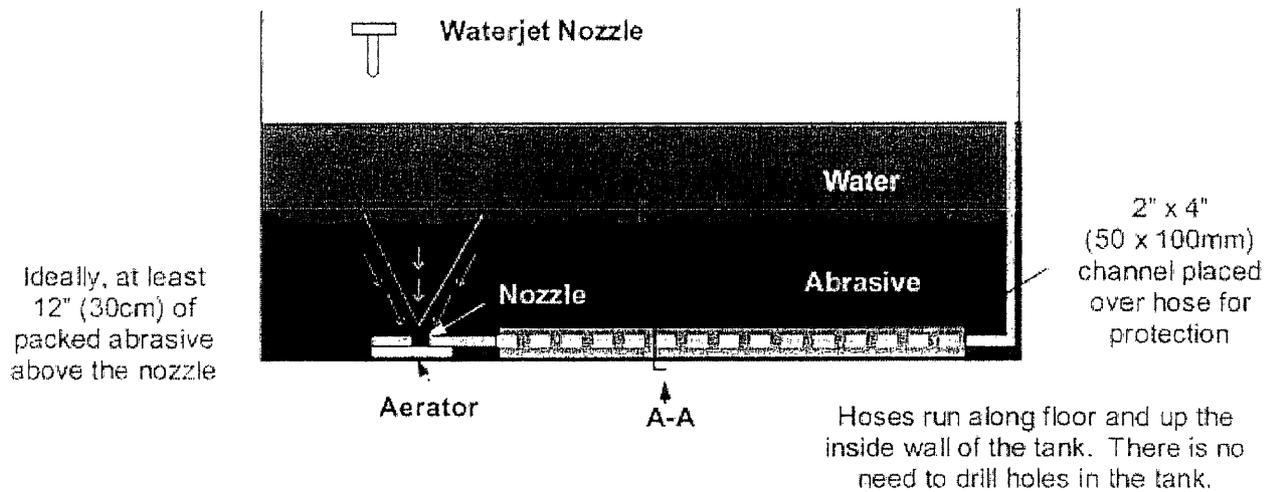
Illustration of abrasive sludge removal from the bottom of the tank using the patented nozzle. Diagram courtesy of WARDJet Inc.
